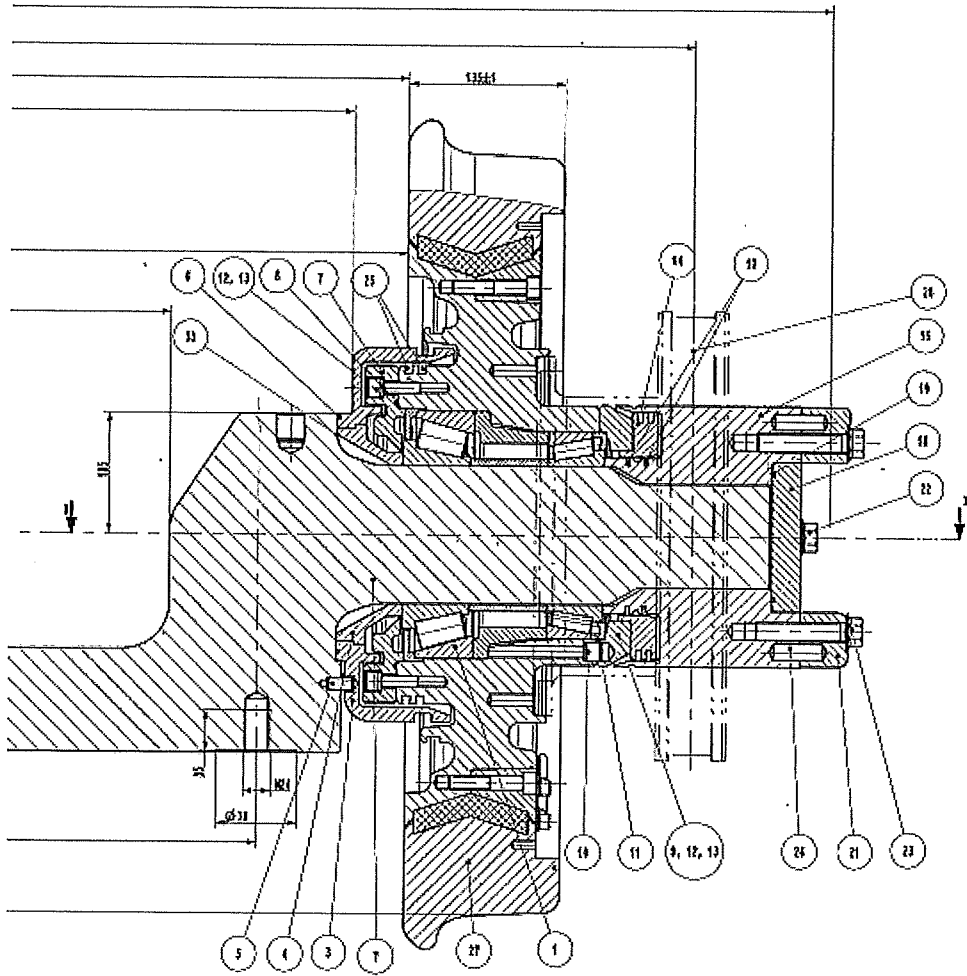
Wheel drawing. The bearing Assy is shown in close-up below.
